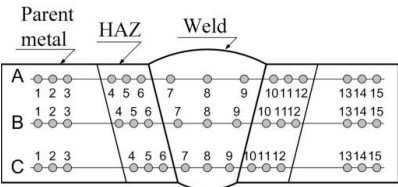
Arrangement of hardness measuring points in welded joints
